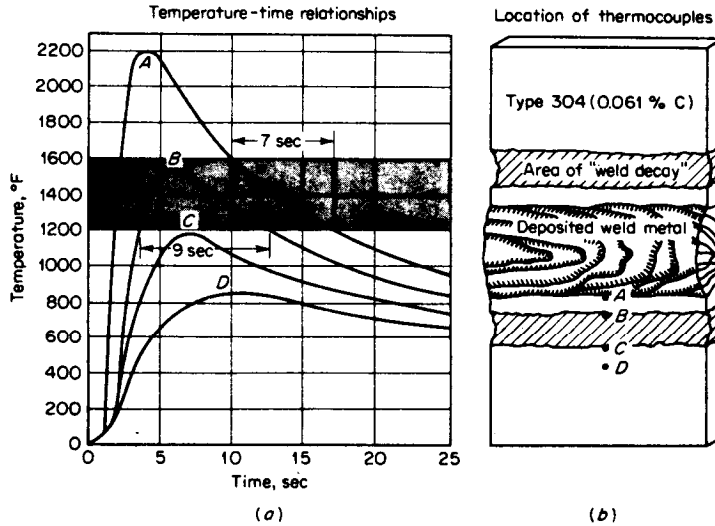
Temperatures during electric-arc welding of type 304 stainless steel. (Du Pont Company)
